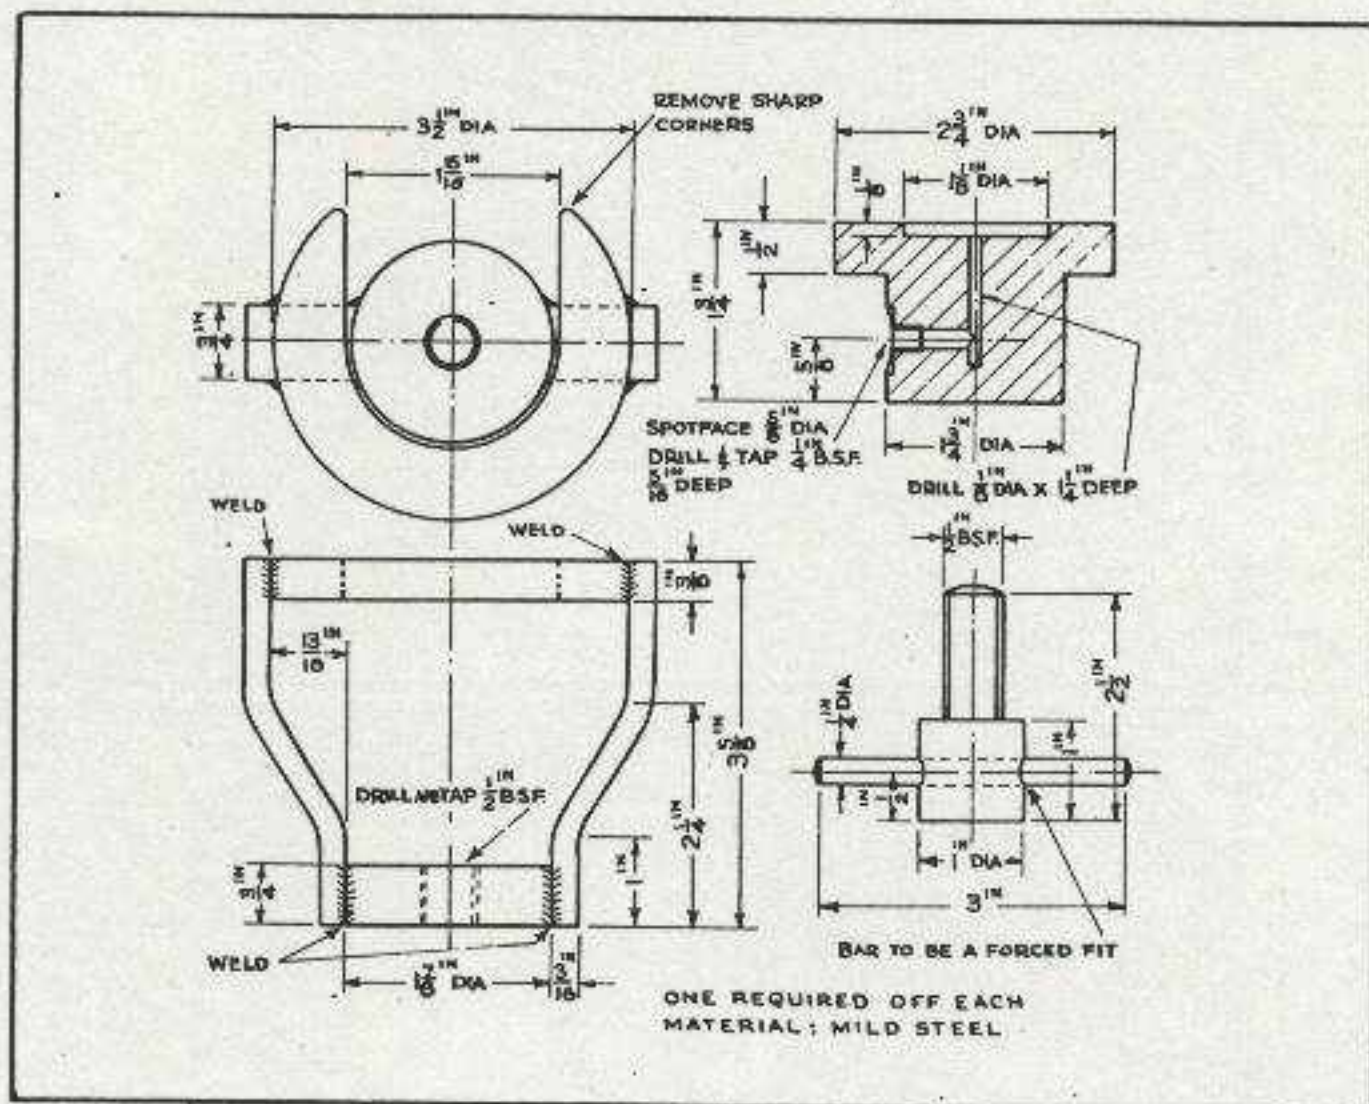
SWITCH, LOW-PRESSURE - CLAMP FOR PRESSURE SETTING CONTACTS
